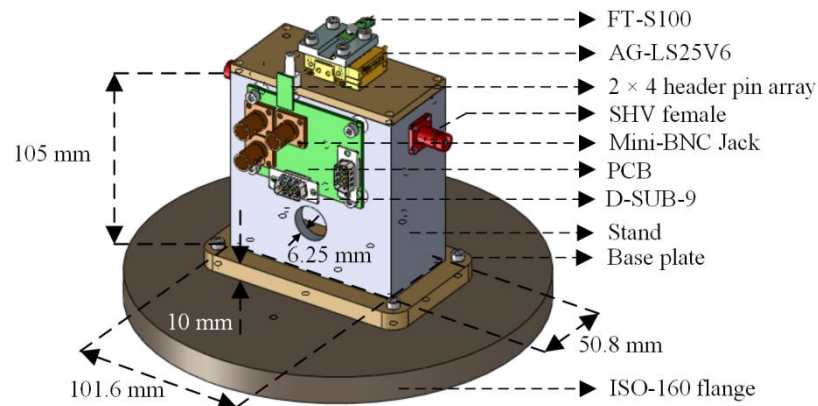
The thrust stand with the force sensor and the PCB on the aluminium stand. The particle intercepting plate is not shown in this figure. See Figure 5.39 for reference.
